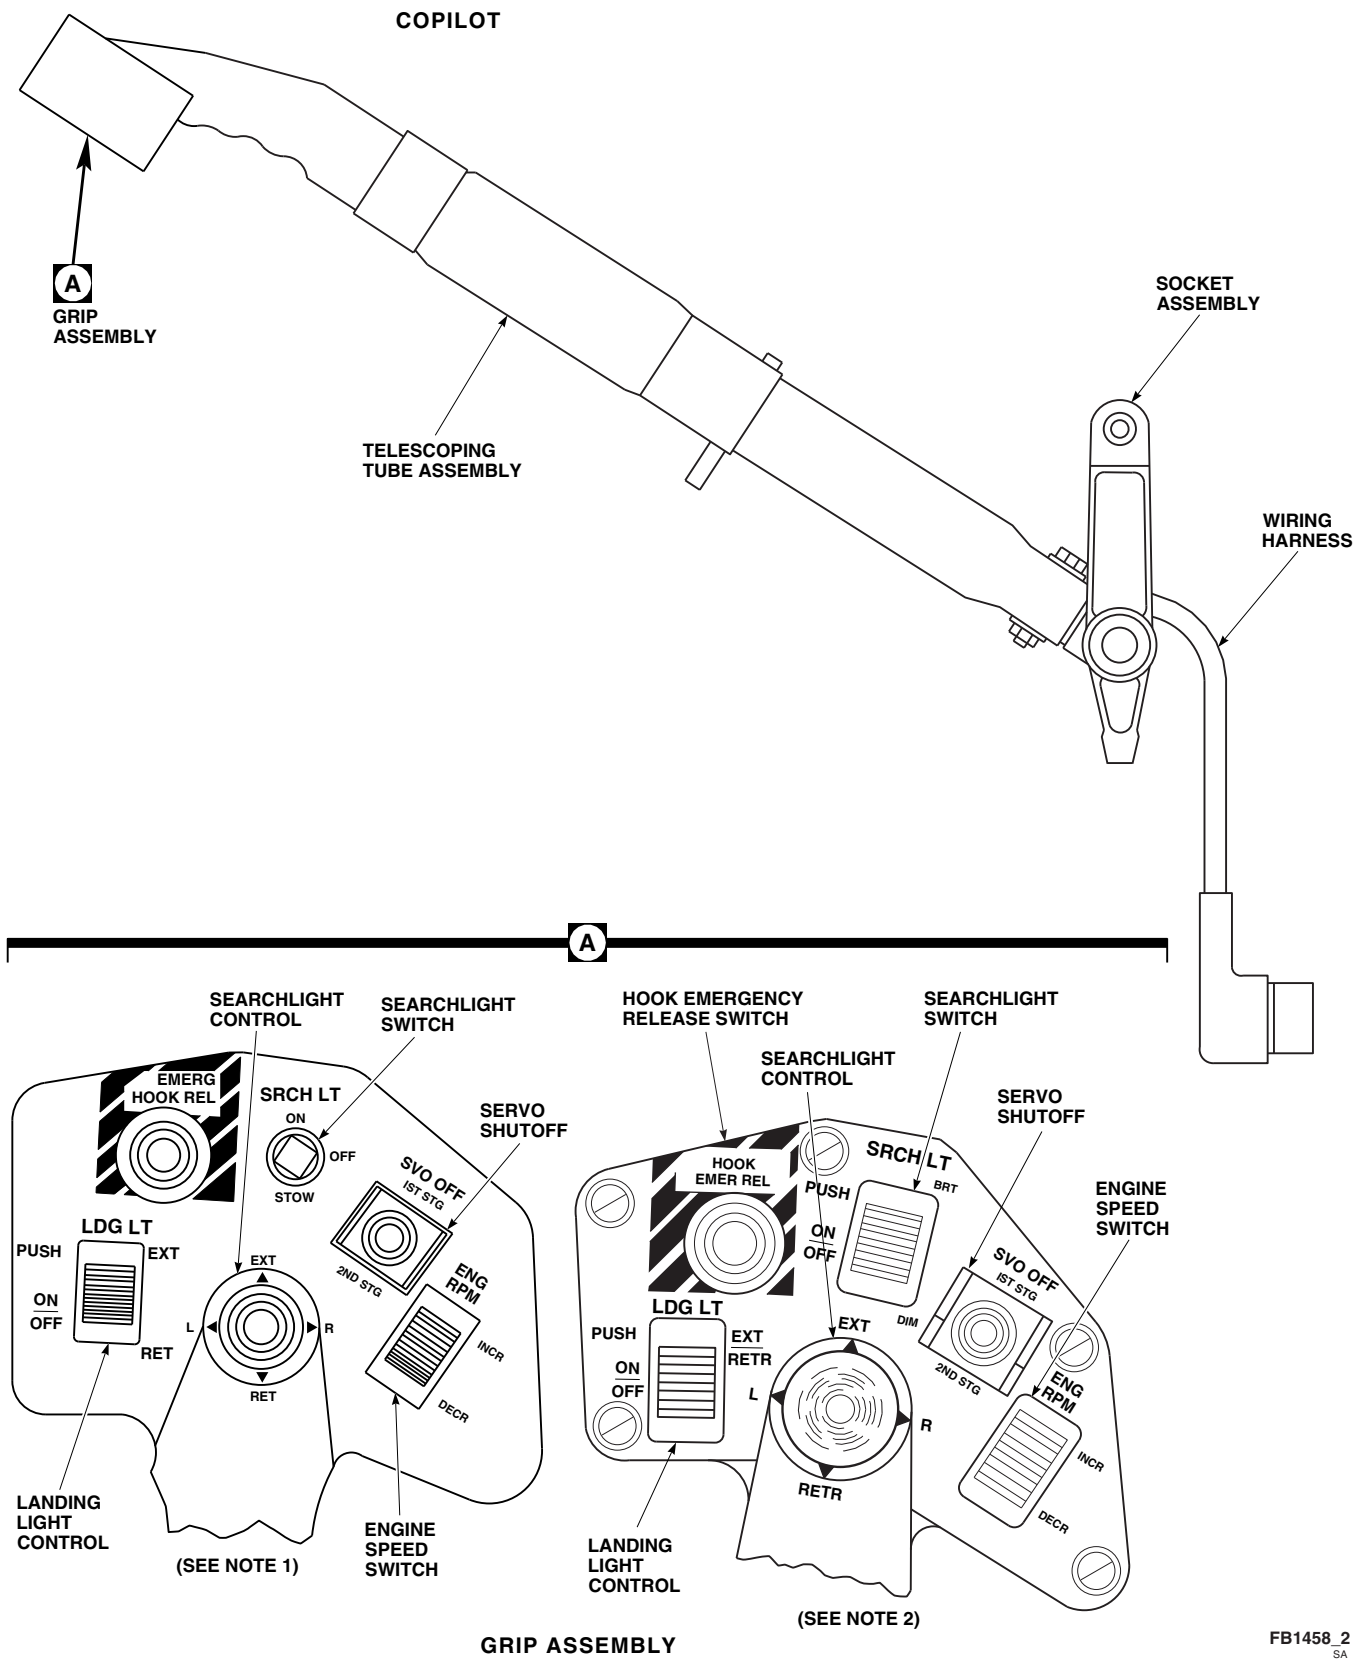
COLLECTIVE STICK ASSEMBLY (SHEET 2 OF 2)
